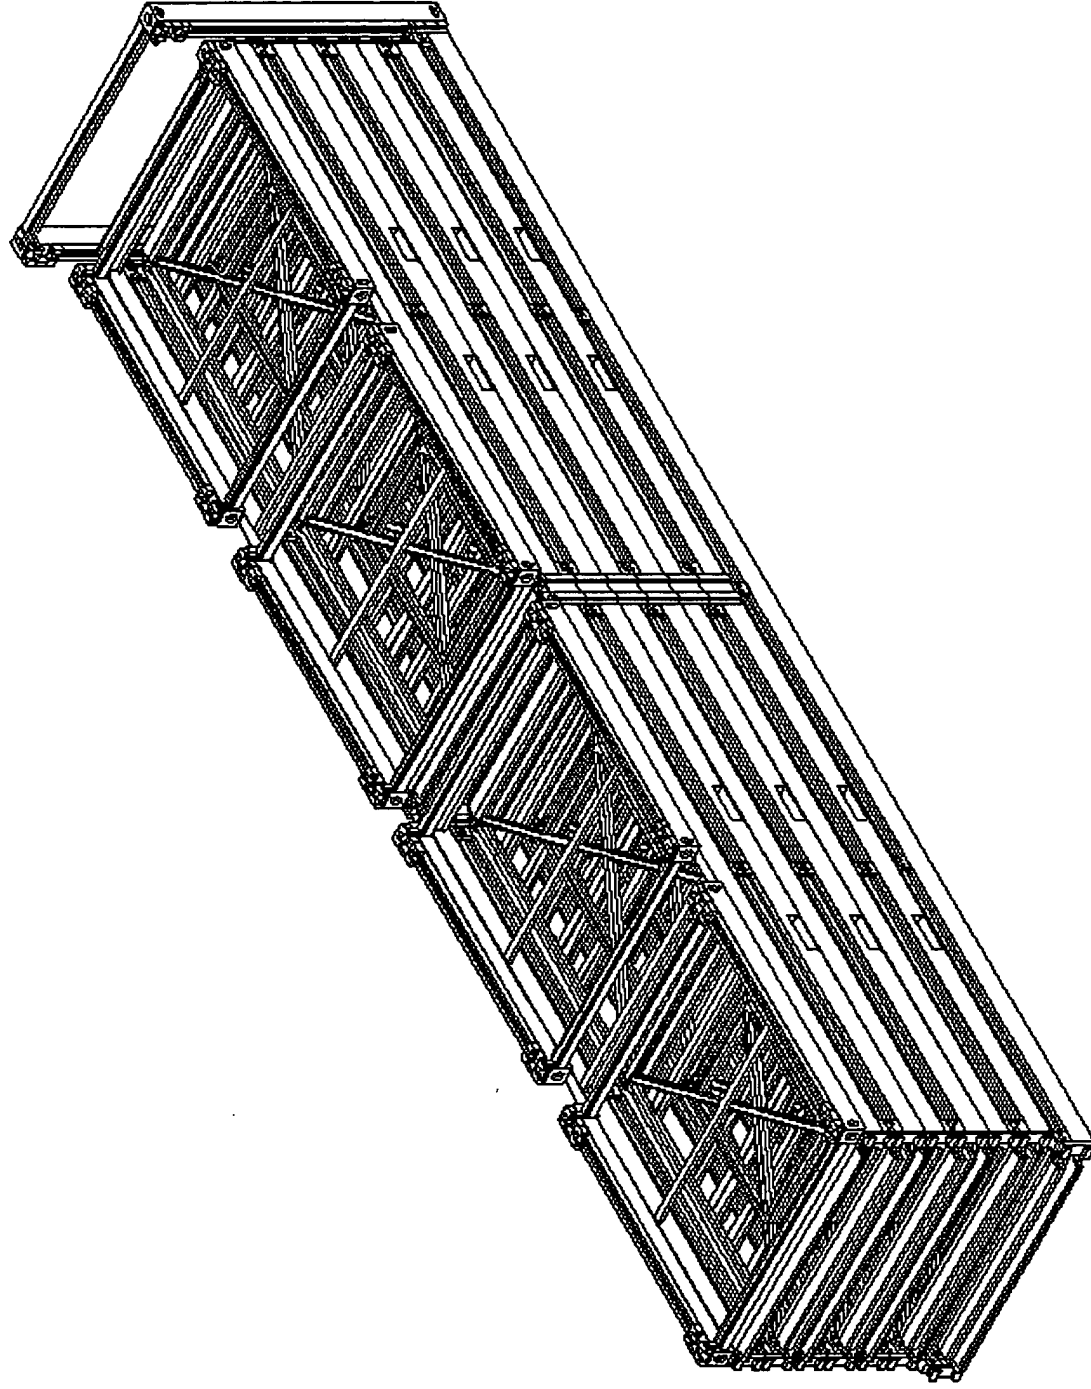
C: Step6 of disassemble and load process: The left frame of the 40 foot shipping collapsible cargo container is assembled.
